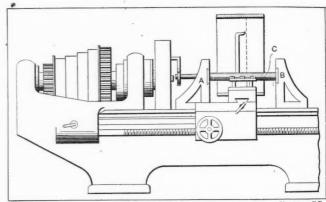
Device for Boring Elliptical Holes in Place on the Lathe
